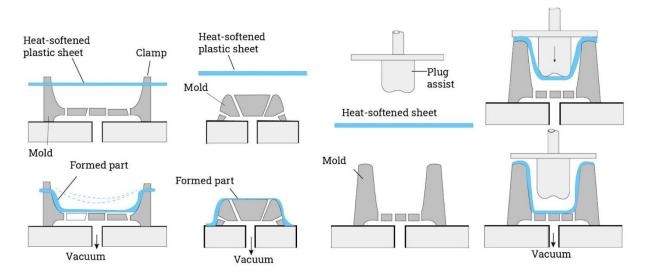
Four Vacuum (thermoforming) moulding techniques¹⁵.
